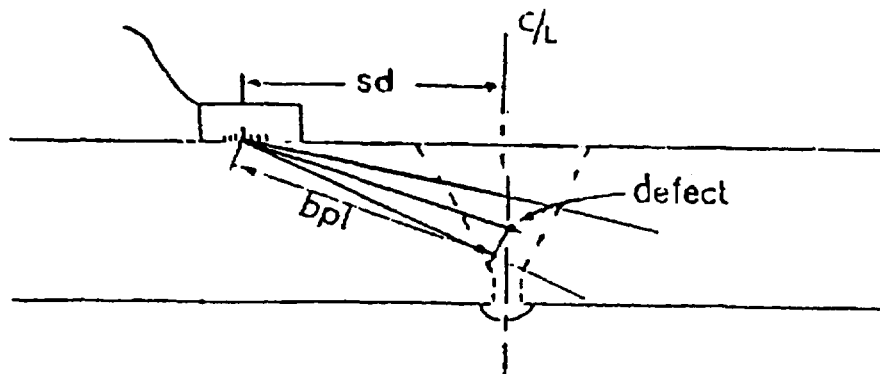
The relevant position of defect, probe, the beam profile and various distances in weld inspection.
